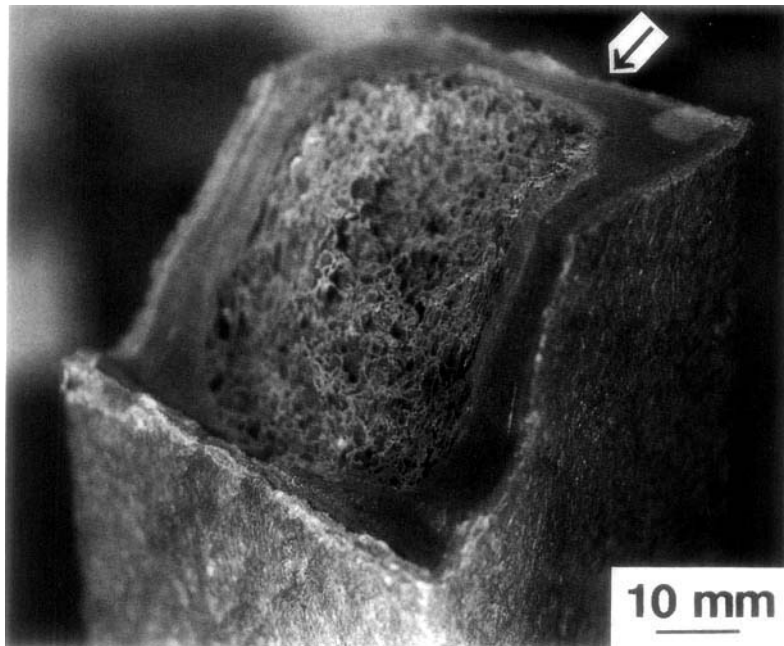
Flexural fracture surface of 75RH (air-cooled). The arrow indicates the tension side of the beam where fracture initiated.
